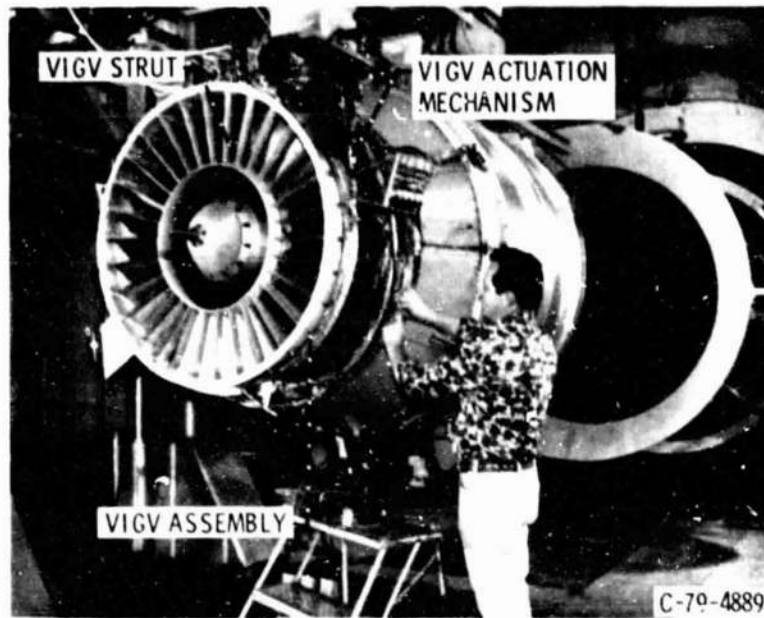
Part-span VIGV installed on YTF34-F5 engine.
